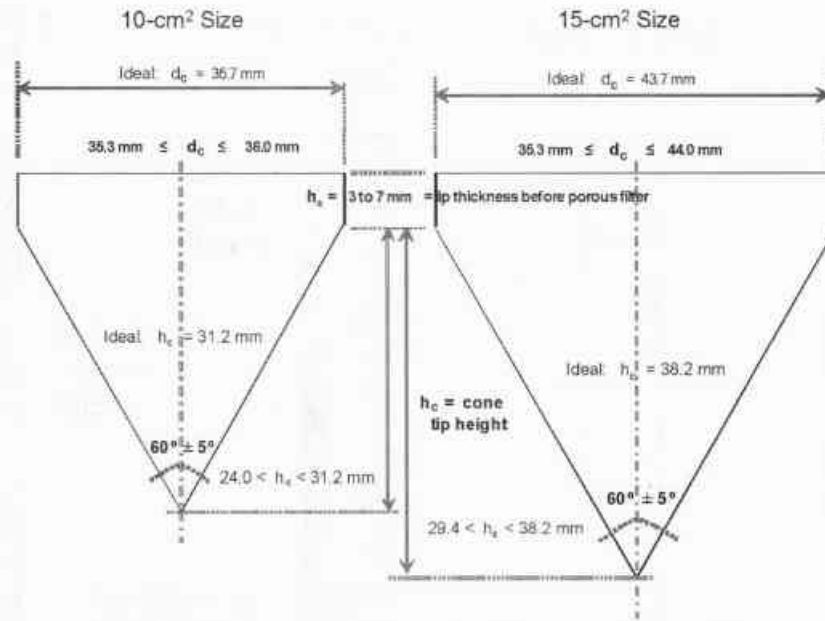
Manufacturing and Operating Tolerances of Cones (3)
